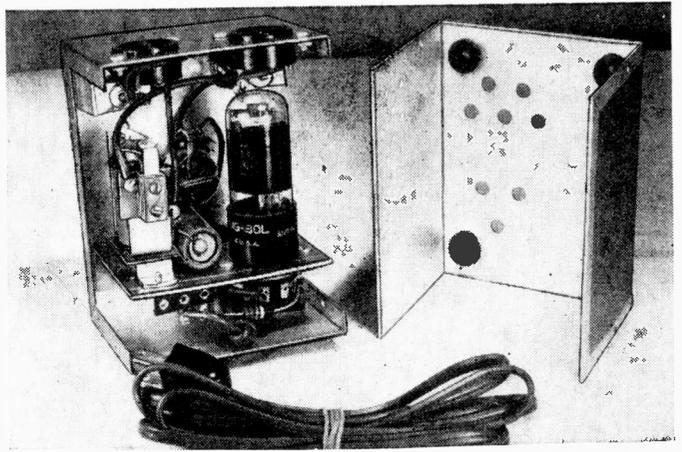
The timer is shown here with the wiring and assembly completed, but before the two parts of the cabinet are assembled. Note the position of the sub-chassis and parts layout. The layout is not critical but it is best to keep it neat and compact.
